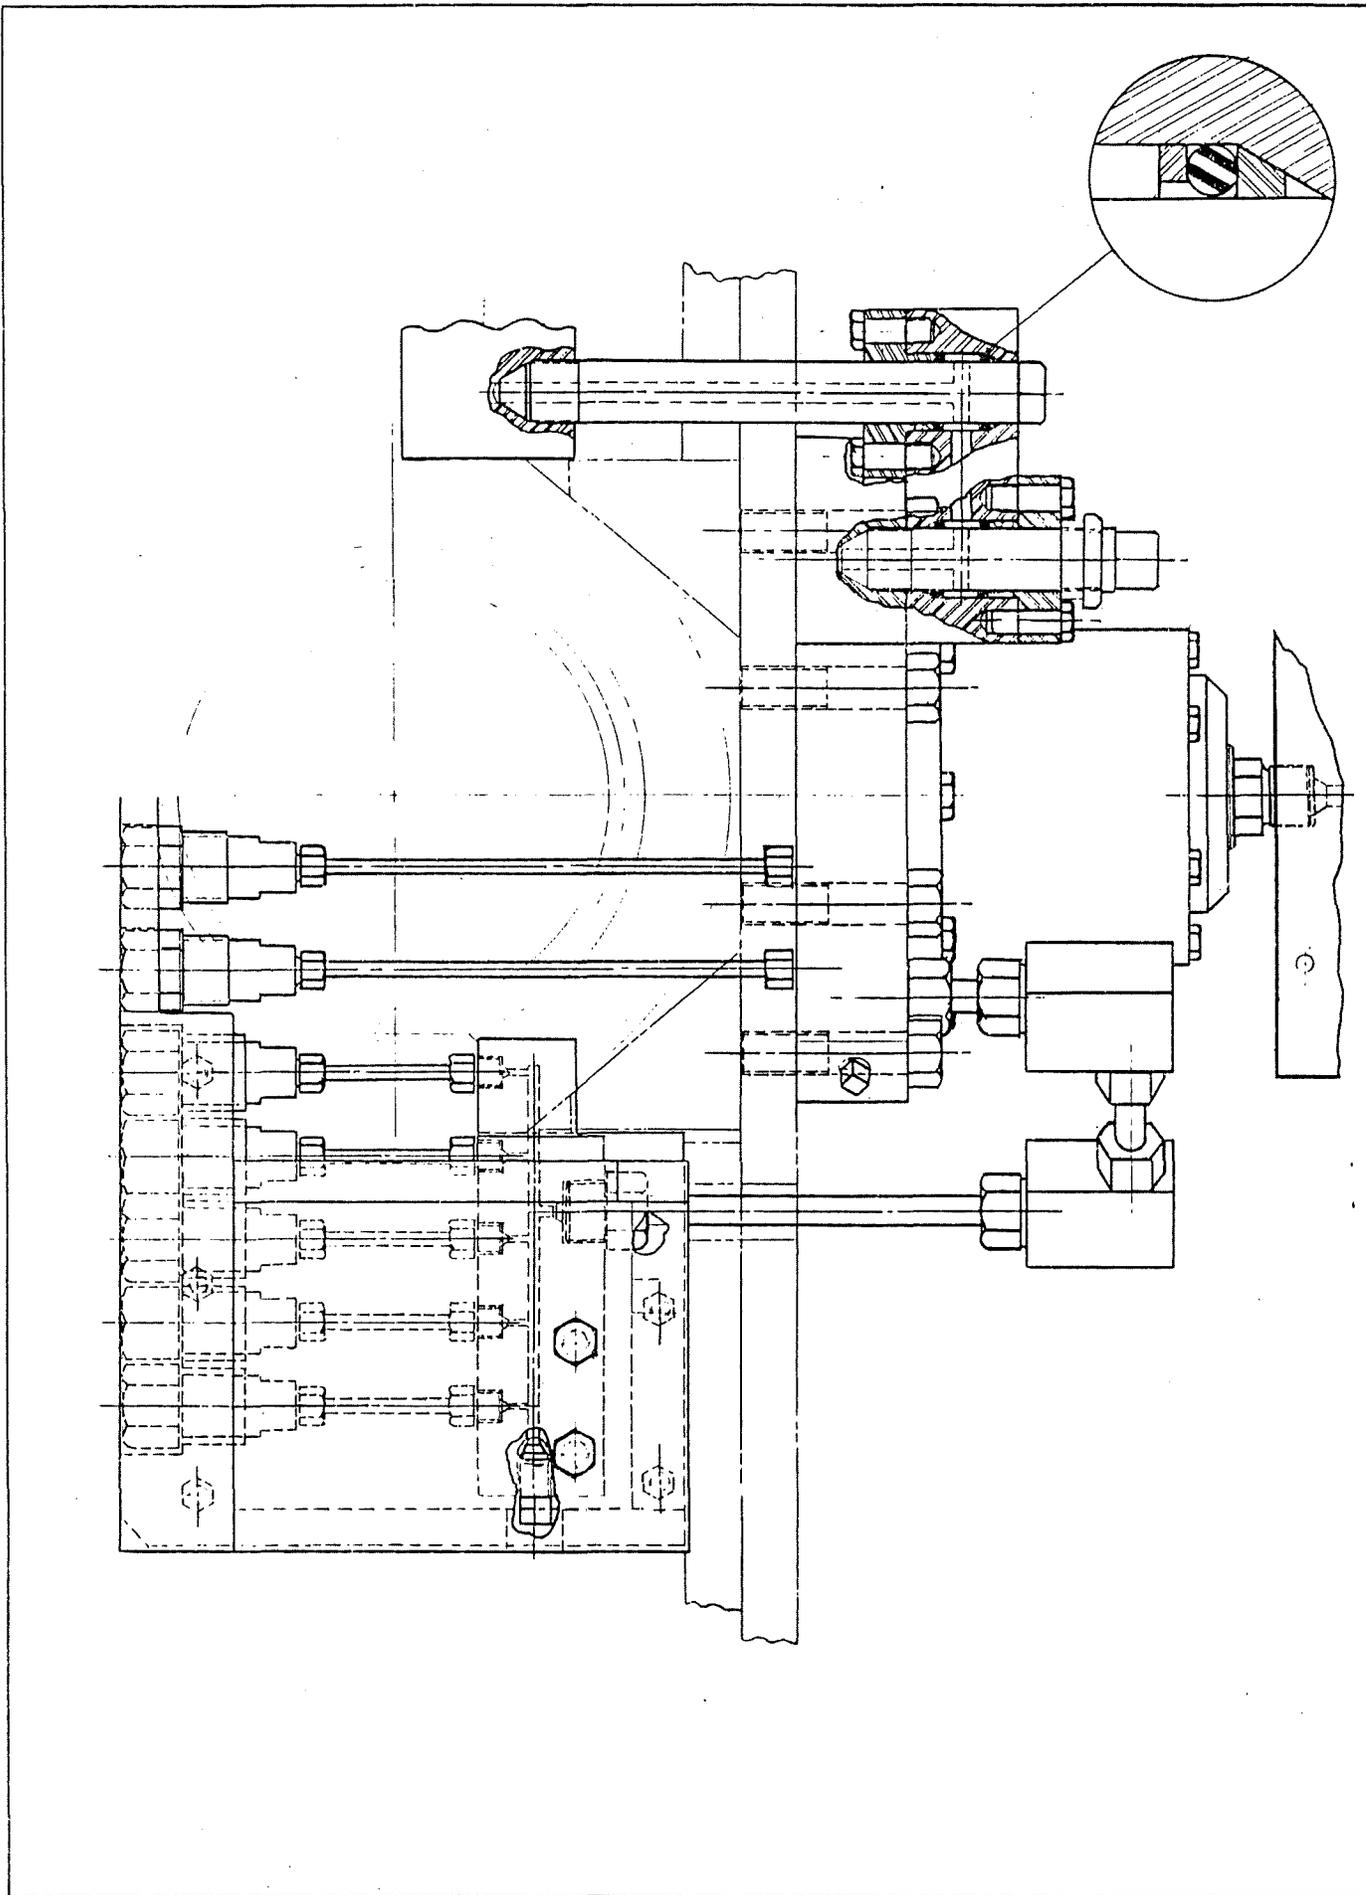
Assembly of Swivel, Inner Manifold, and Link to Outer Manifold
